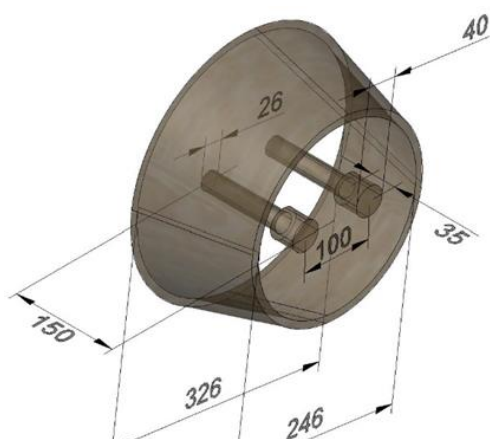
Dimensions of concrete plug mould of LNSC pushout Tests 1 and 2
